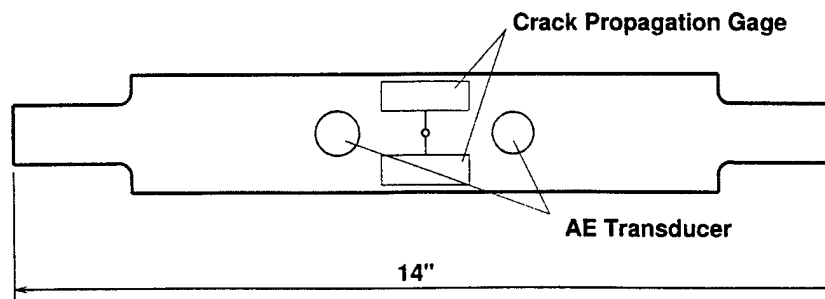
Specimen geometry and AE transducer location for fatigue loading.
